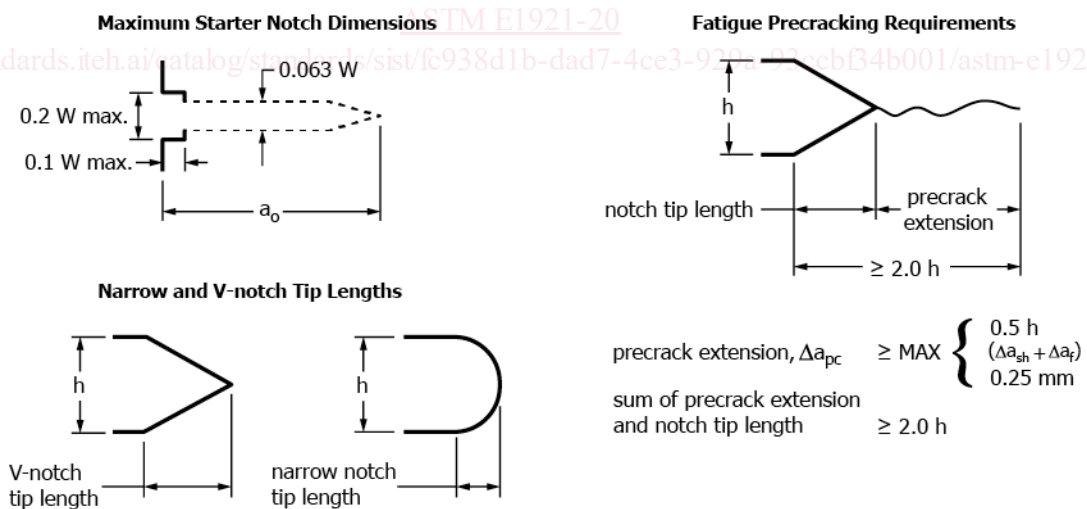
Envelope of Fatigue Crack and Crack Starter Notches
